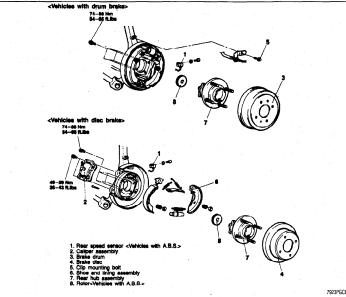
Exploded view of the rear hub/bearing assembly and related components—Galant
